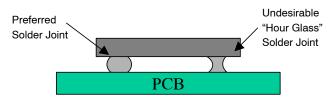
Illustration of Preferred and Undesirable Solder Joints
